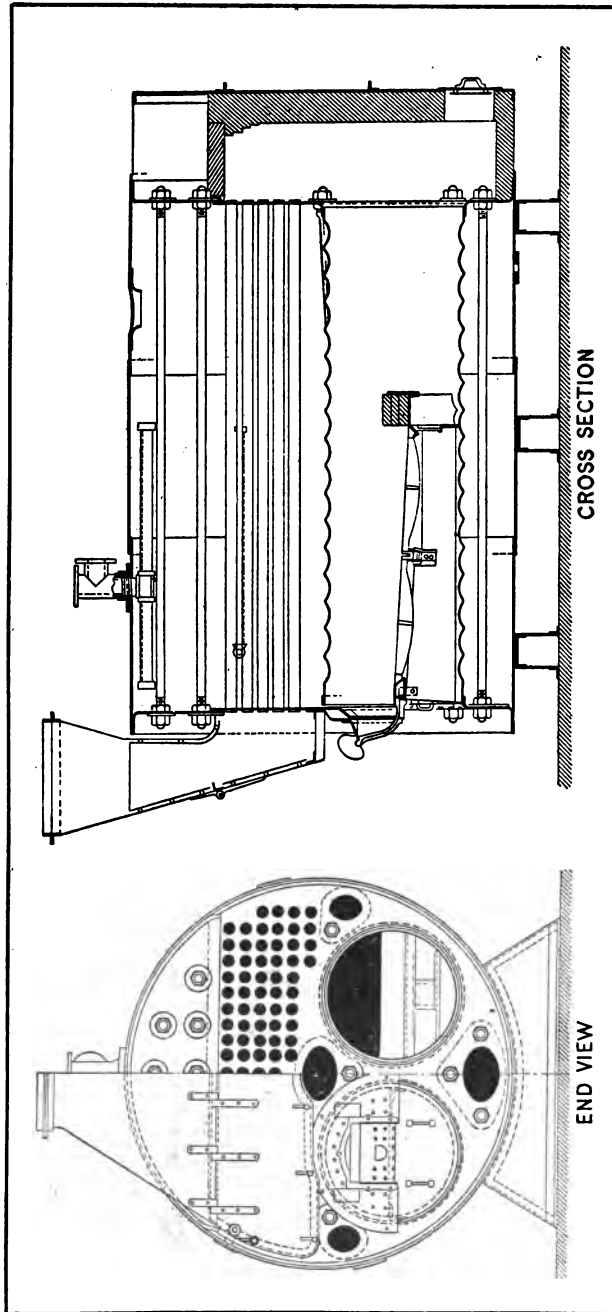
END AND SECTIONAL VIEW OF SCOTCH MARINE TYPE BOILER
